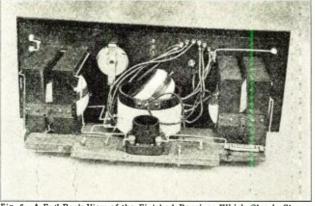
A Full Back View of the Finished Receiver Which Clearly Shows the Wiring.
